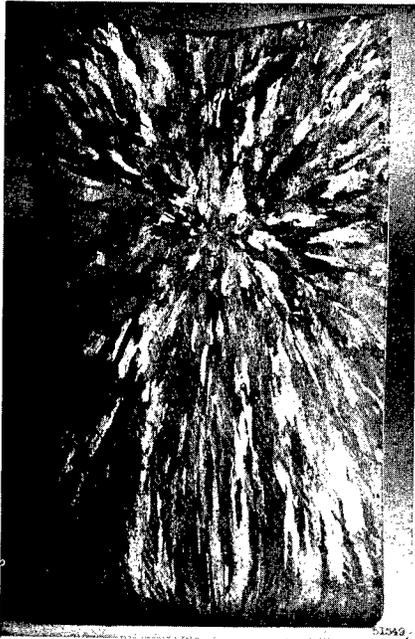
Longitudinal macro-section of vacuum-melted iron ingot showing large grain size of the as-cast material
